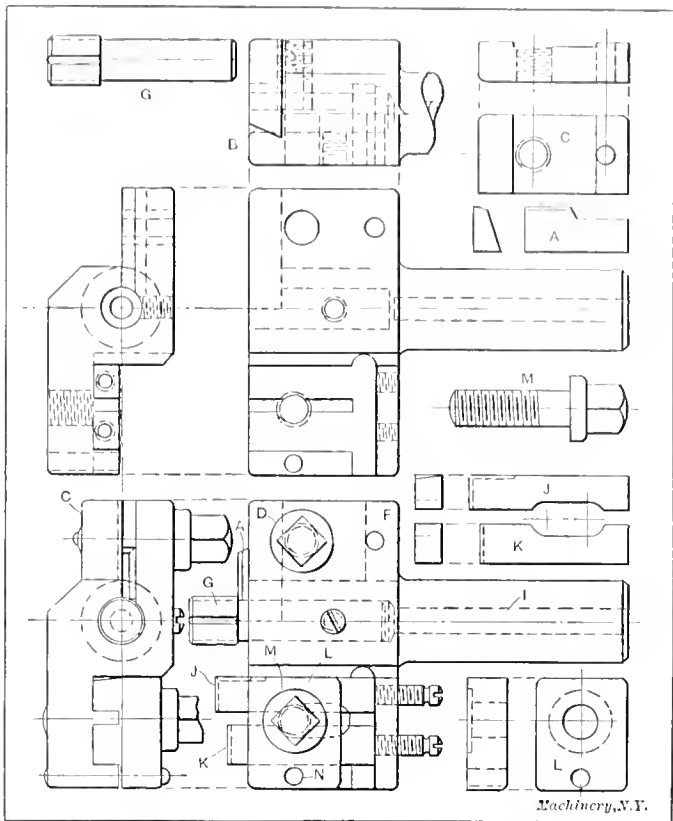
Tool for Facing the Extension Hub Side of the Pulley
